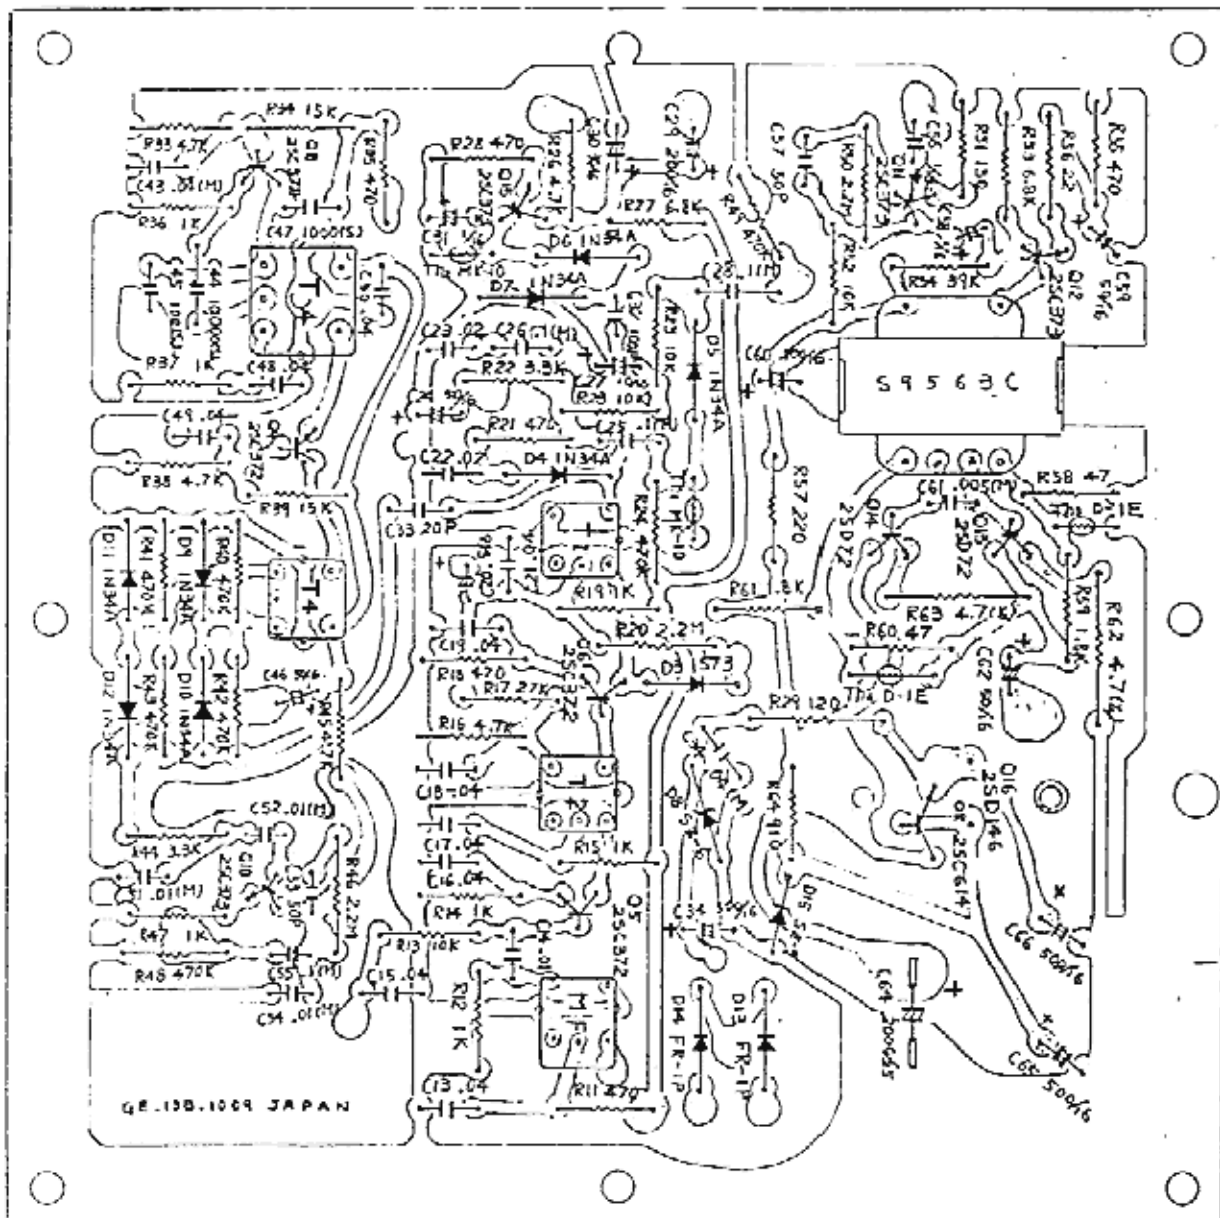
MAIN PRINTED CIRCUIT BOARD TOP VIEW
